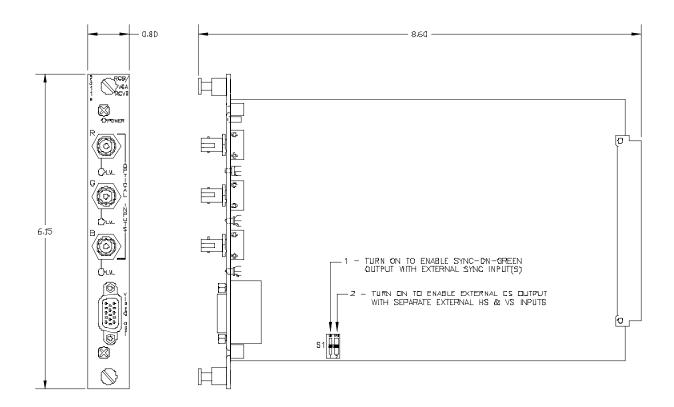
9311R DIMENSIONS AND SWITCH LOCATIONS
